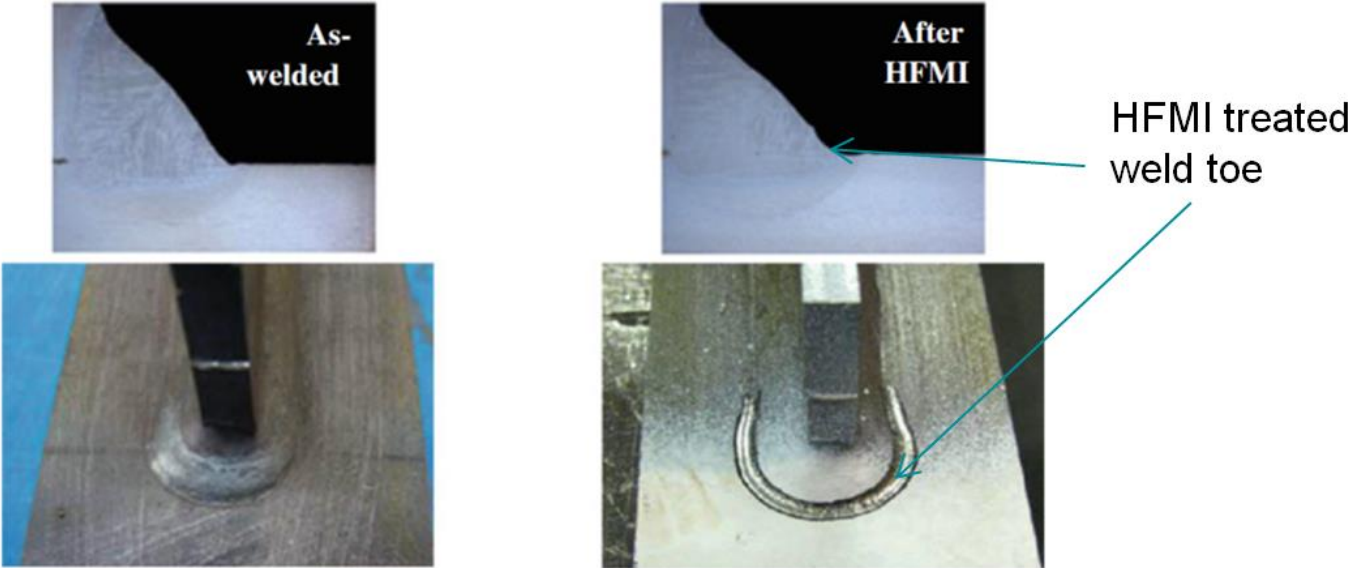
Typical application of post-weld treatment HFMI; Left: a MAG fillet weld in as-welded condition and Right: after HFMI treatment (from [1])
